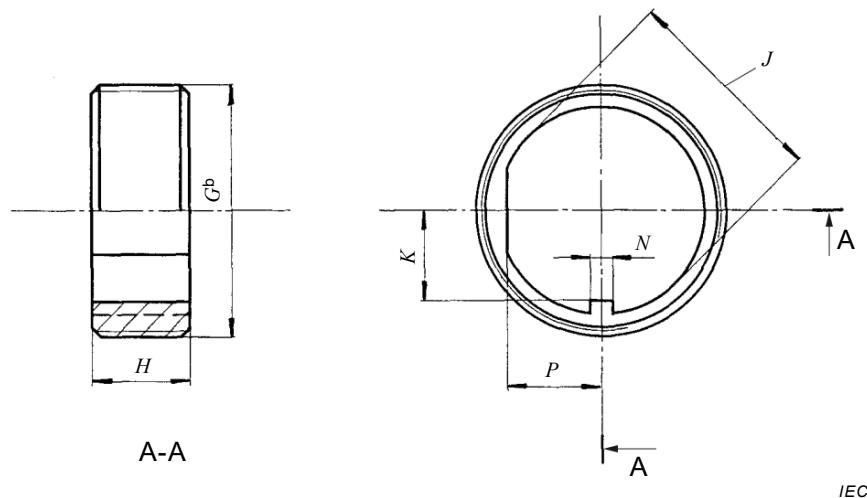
Flange type C: 60154 IEC-PCR 220-500
